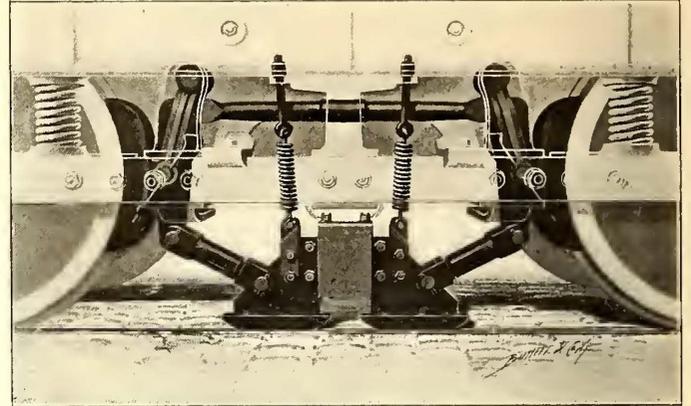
VIEW SHOWING METHOD OF ATTACHING BRAKE, TO CAR
